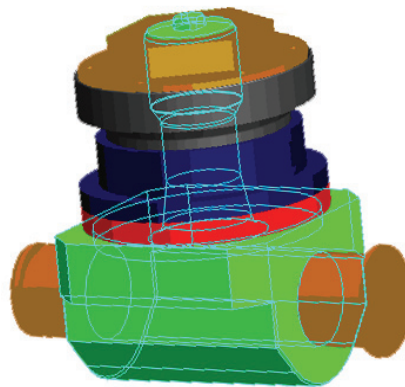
Entity model diagram of the joint equipment of Self-adjusting Bolt.
